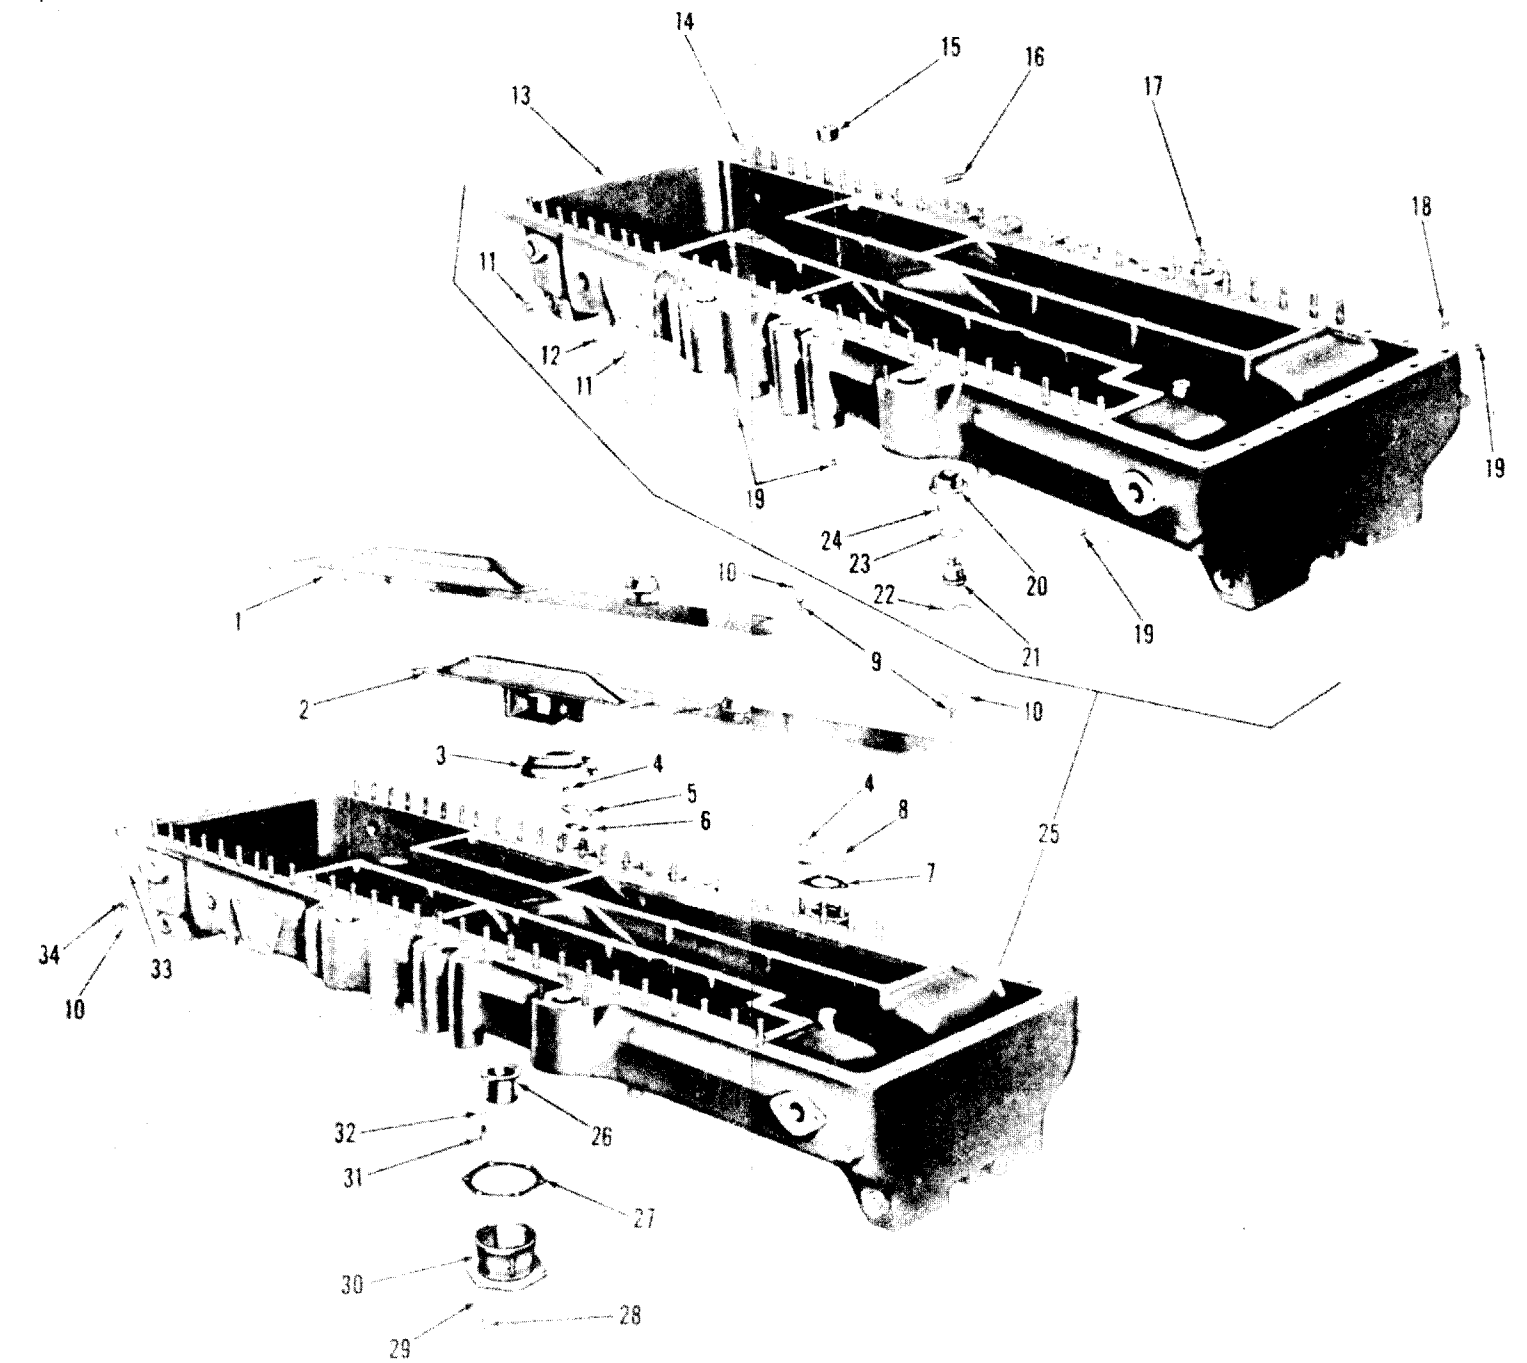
Oil Pan, Baffles, Studs, Inserts and Associated Parts—Exploded View.
